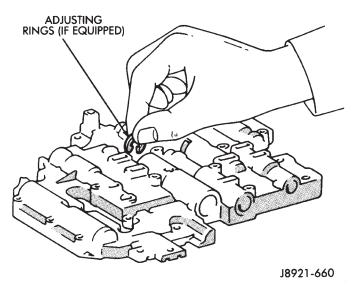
Install Throttle Valve Adjusting Rings (If Equipped)
